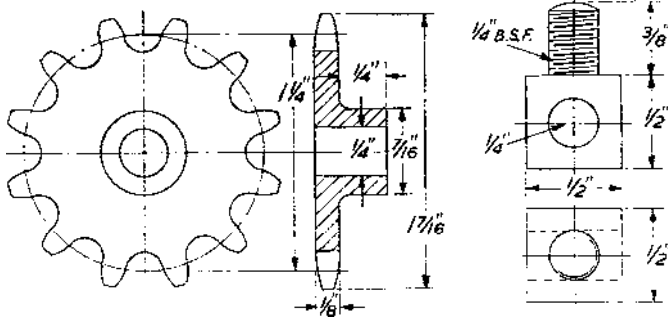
Stop indexing pinion and bearing block (1 off each).
